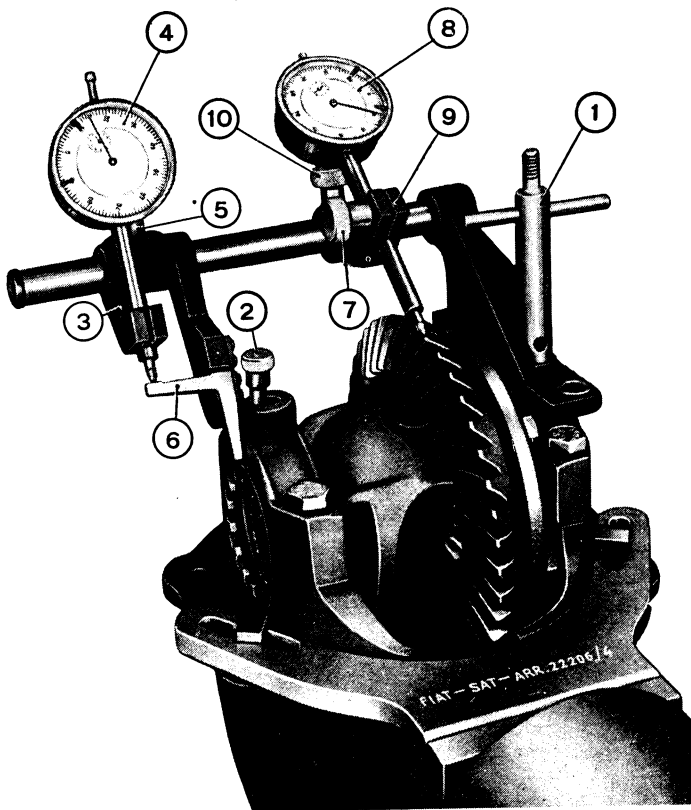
Checking ring gear-to-pinion backlash and differential case roller bearing preload using fixture A. 95688.
